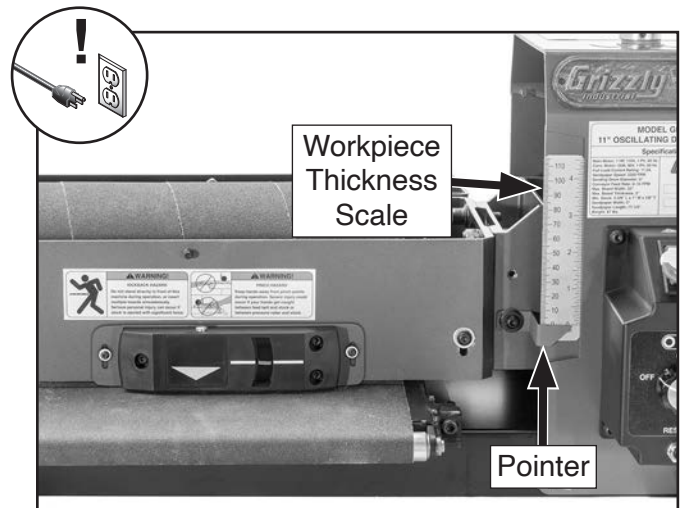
Sanding drum adjusted down to zero workpiece thickness scale.
